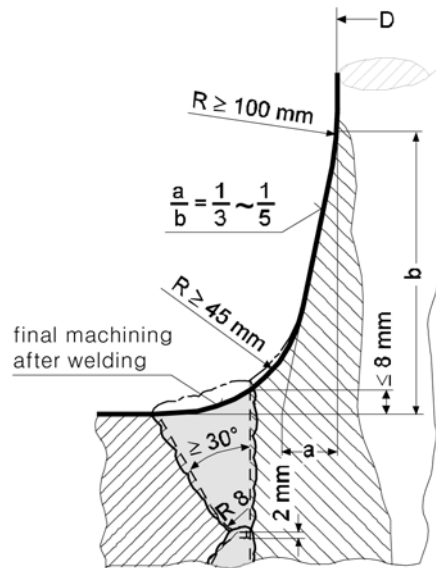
Welded joint between rudder stock and coupling flange
